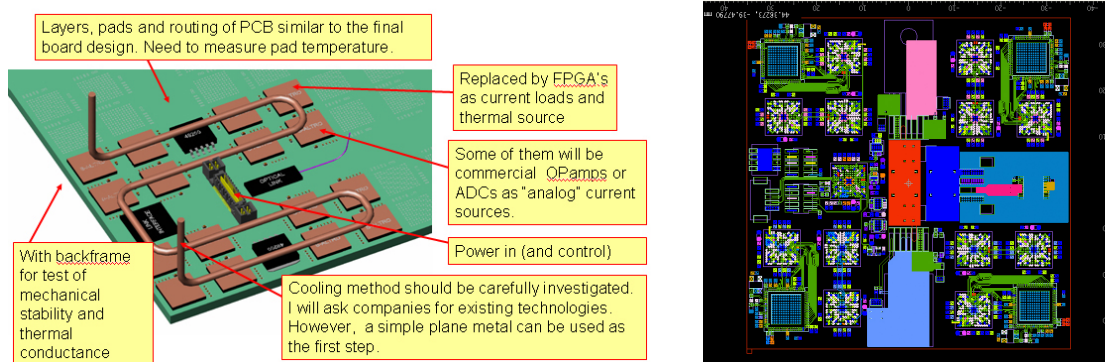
Left: Illustration of one section of the pad-board design. Right: One section of a test PCB with FPGAs, which mimic the pad PCB with the S-ALTRO readout electronics, for the test of power delivery, power pulsing, and cooling. For pads of the size of  $1.1 \times 4.5 \text{ mm}^2$ , there are 12 identical sections on the test PCB.
